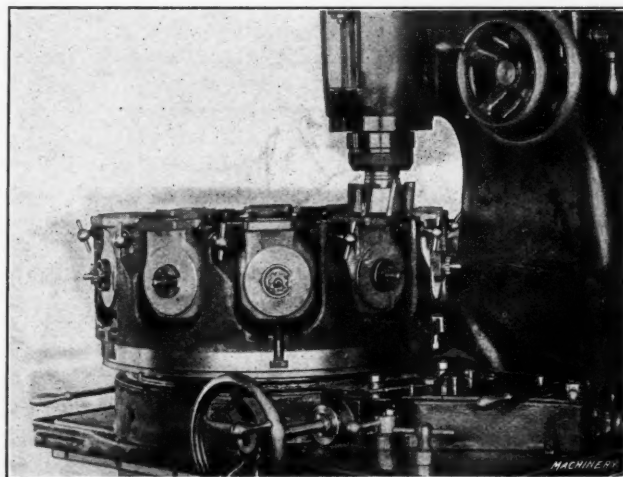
Fixture used for milling Work of Form shown at No. II in Fig. 2
